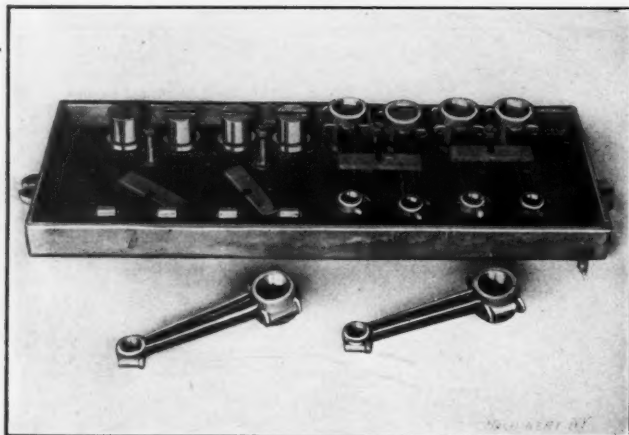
Milling Jig used in Splitting the Connecting-rod Case into Two Pieces
